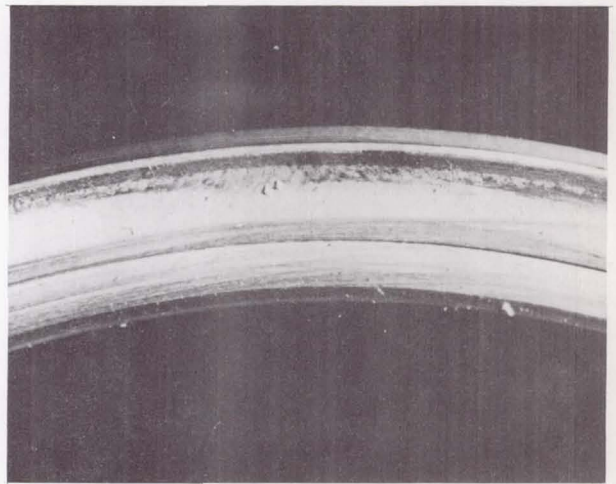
"K-seal" scuffed heel caused by dry assembly
